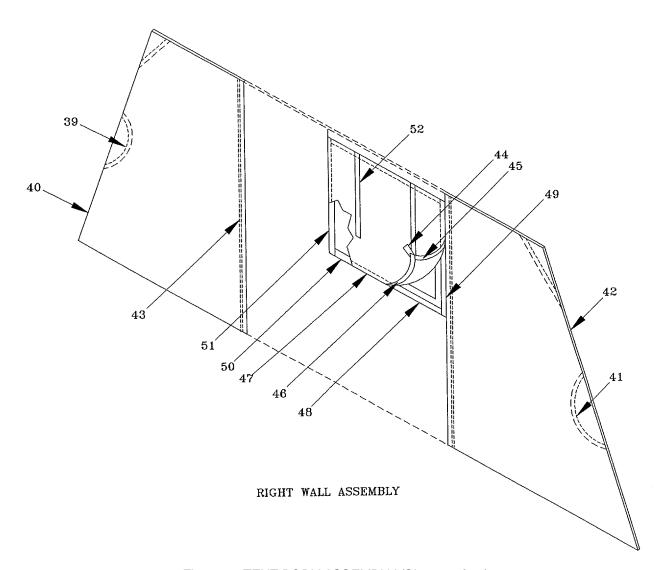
TENT BODY ASSEMBLY (Sheet 5 of 10)
